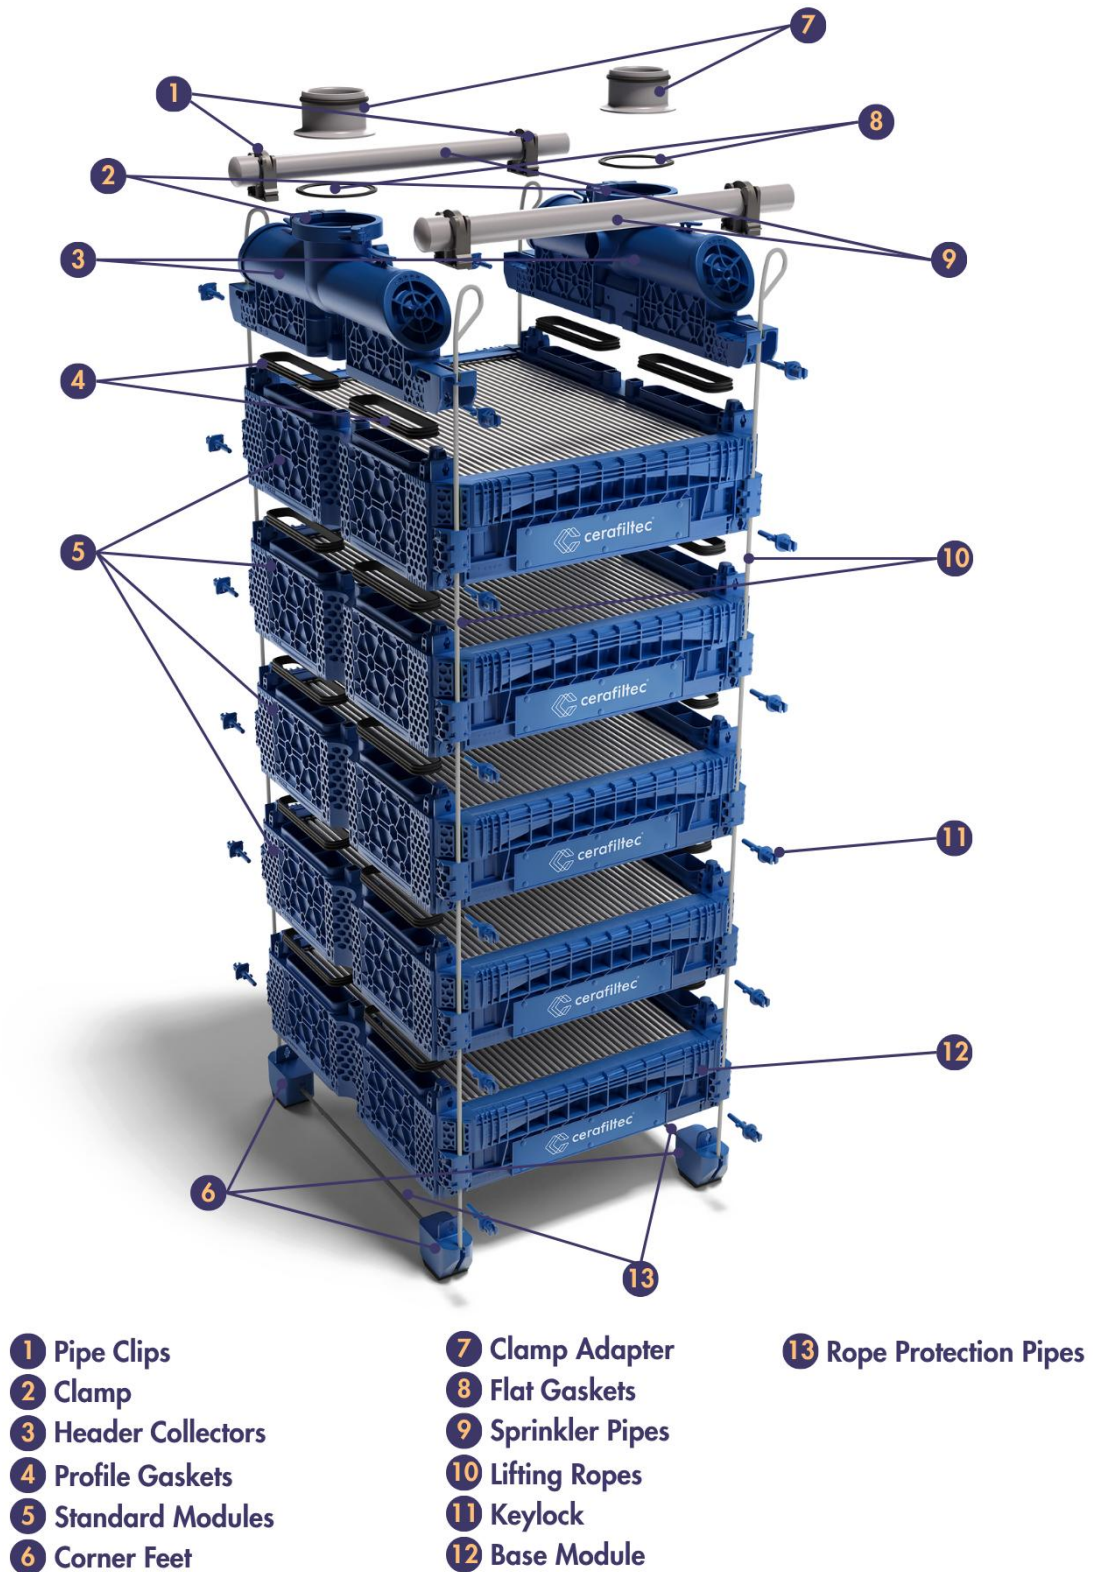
Exploded view of a Cerafiltec module tower showing the main tower components.
